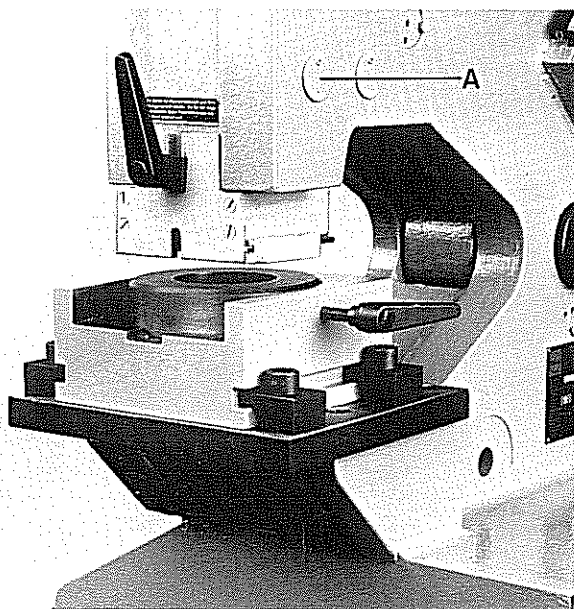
Special punching equipment for accommodating punches and dies exceeding 50,5 mm including 80 mm cutting diameter with HPSN 600
